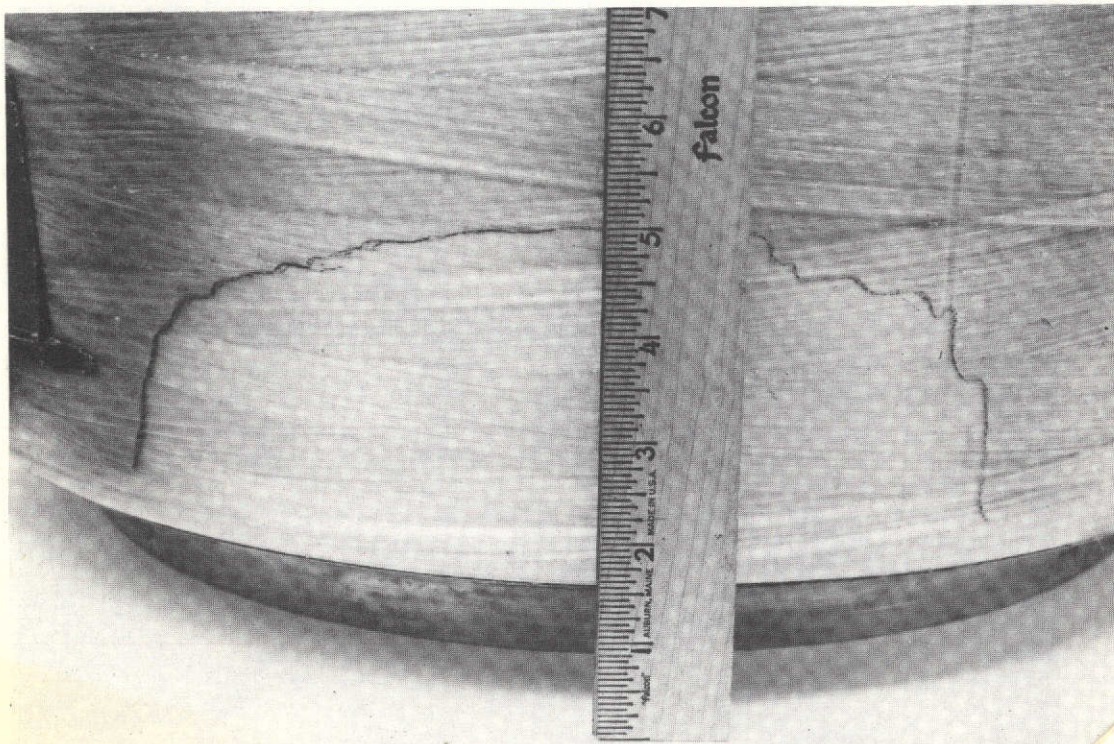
Disbond Areas on 46 cm (18 in.) Diameter Vacuum Jacket (G-Assembly)
